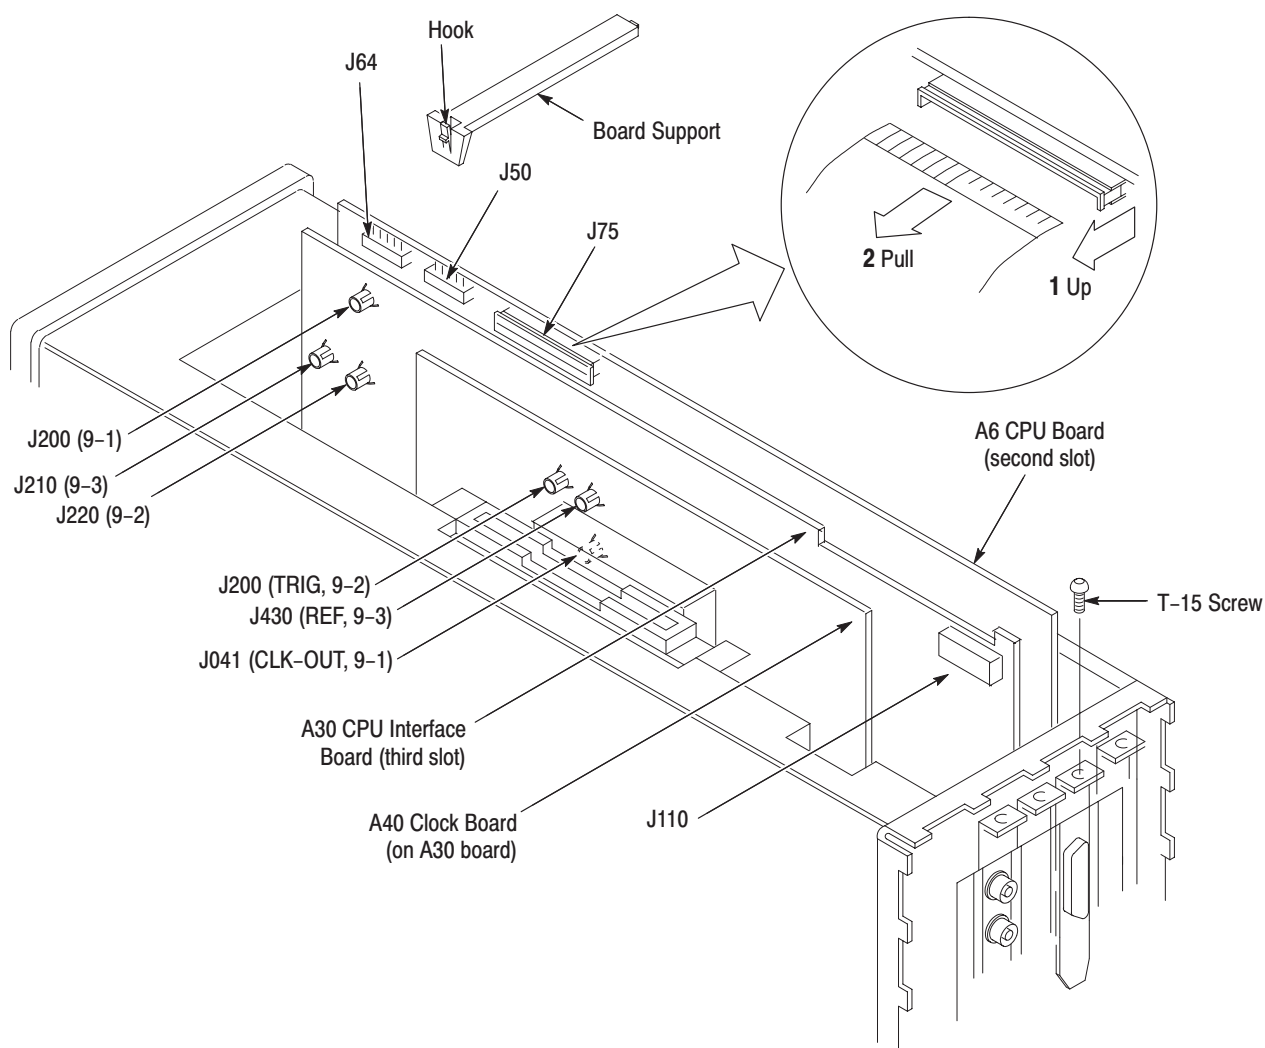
A6 CPU board, A30 CPU Interface board and A40 Clock board removal
